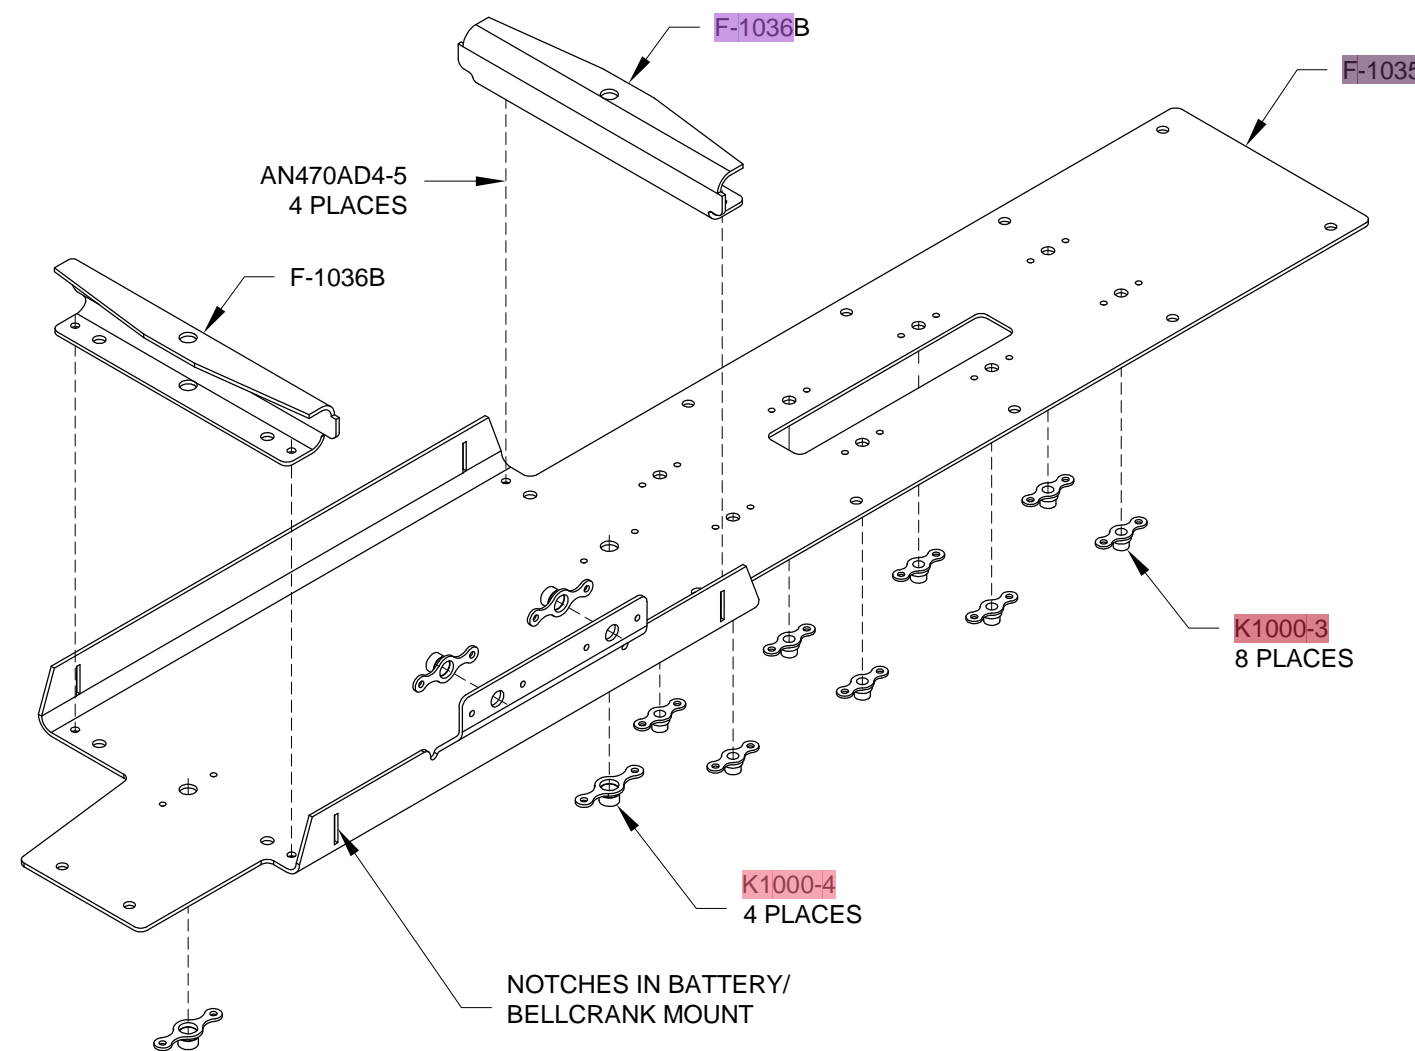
RIVETING THE BATTERY/ BELLCRANK MOUNT
